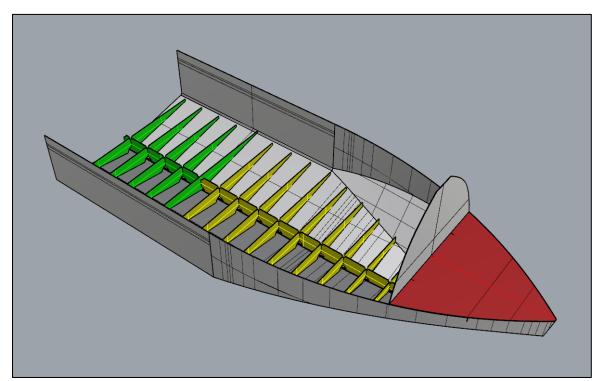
Keel tank divided into two sections. 3/16" thick aluminum 6061 transverse frames spaced 12" apart with a 1/4" thick central girder along the keel tank.
